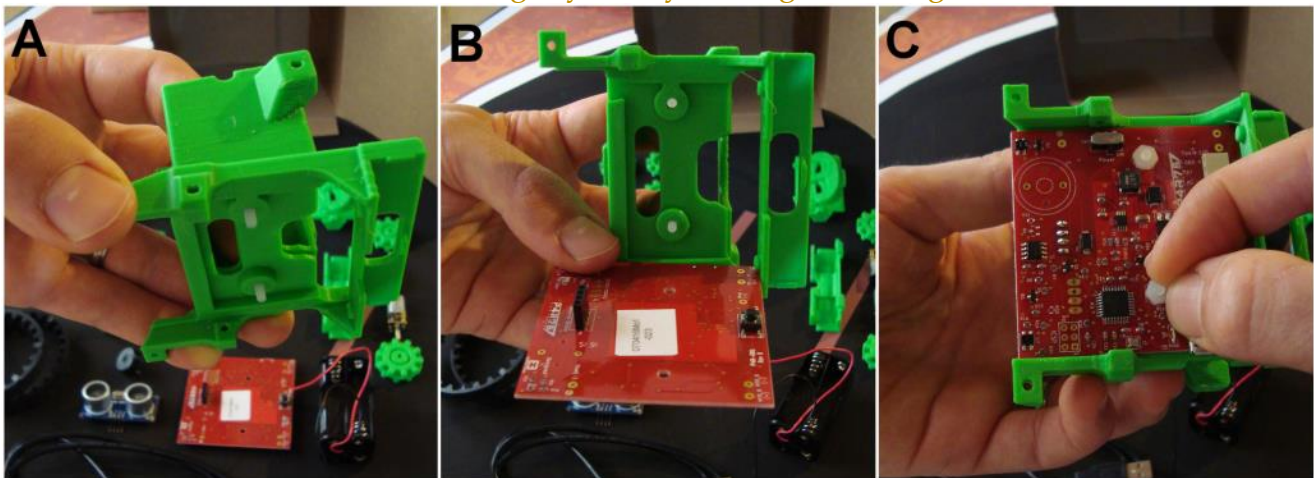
Bolting the battery compartment, chassis, and circuit board together.
